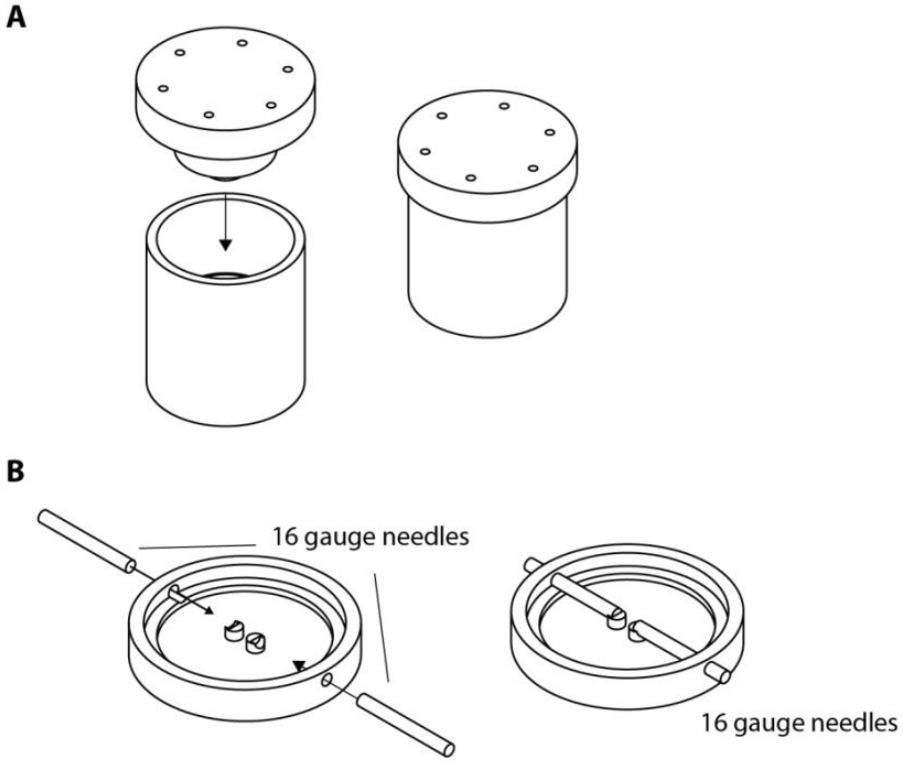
Designs of the molds for the valve. (A) Mold for the cylindrical wall-membrane assembly. (C) Mold for the top and bottom flat faces with internal channels for flow of air.
